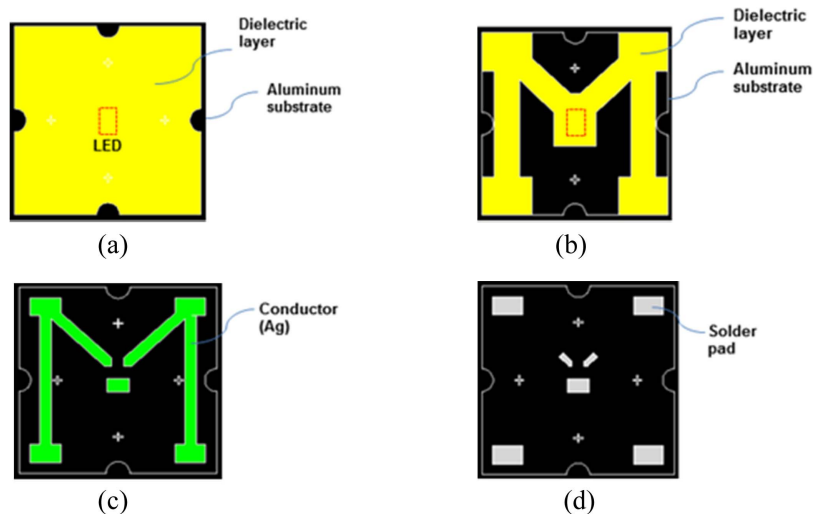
CAD drawings of single-chip mounted ceramic-metal based LED packages for 1 watt lighting engine (25×25 mm² size): (a) fully covered, (b) partially covered with glass-ceramics on aluminum substrates; (c) conductor (Ag) pattern and (d) solder pad pattern for LED mounting.
